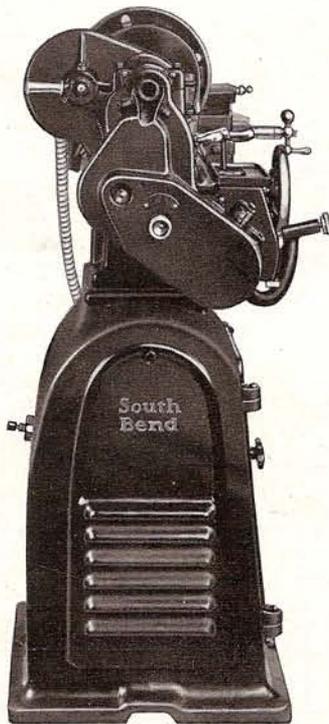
End View of "V" Belt Motor Driven Lathe, showing Removable Ventilator End Plate in Position.
